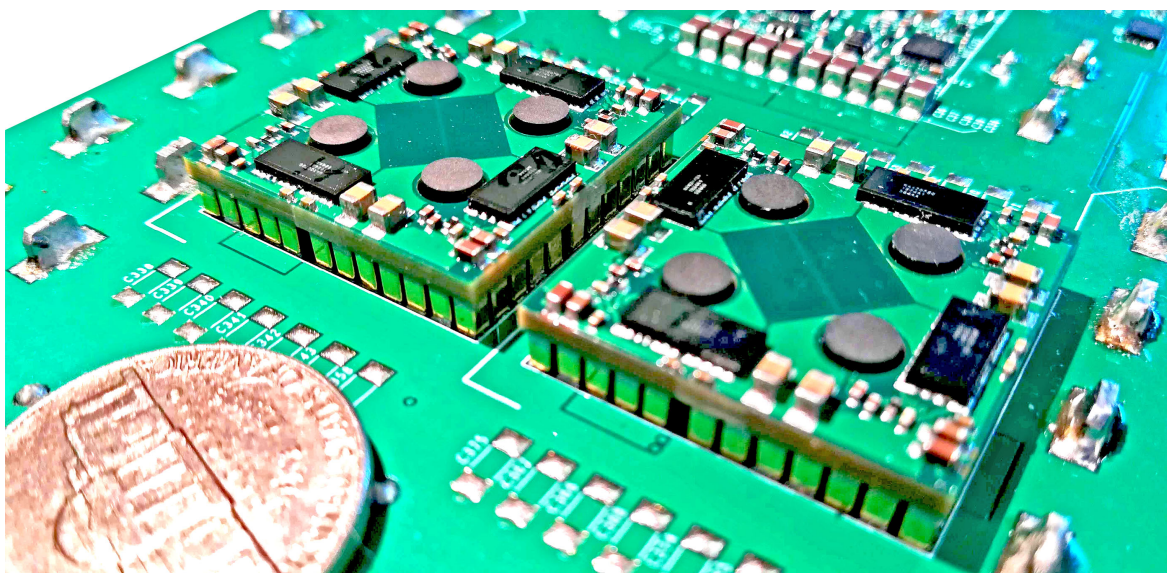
Fully-coupled buck mounted on the bottom side of the main board without core plates.
